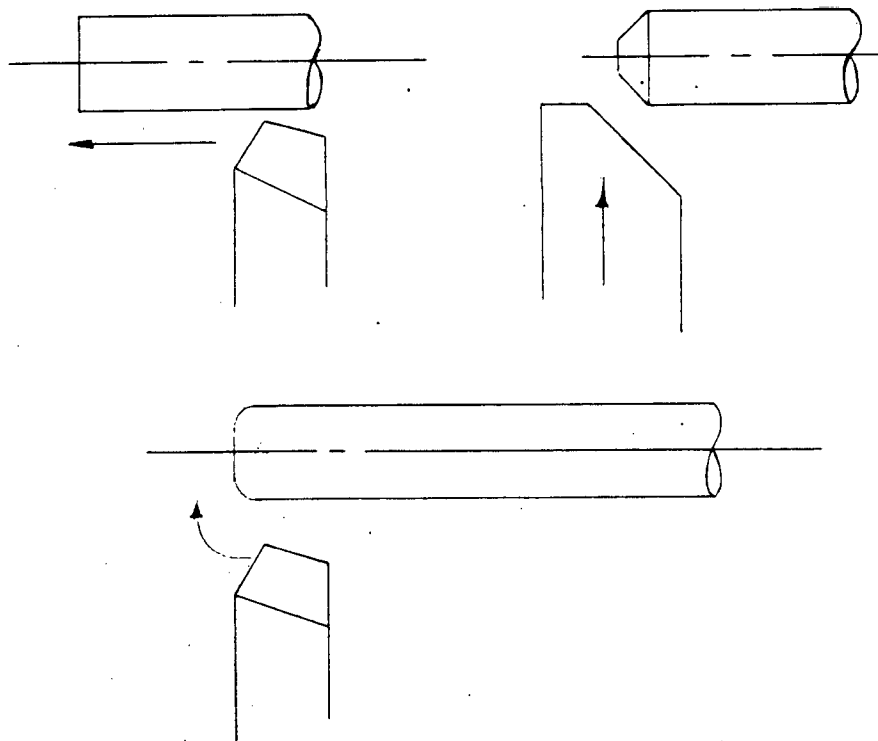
Programming Automatic Screw Machines to Generate Edge Breaks Rather Than Use Plunge Chamfer Tool
